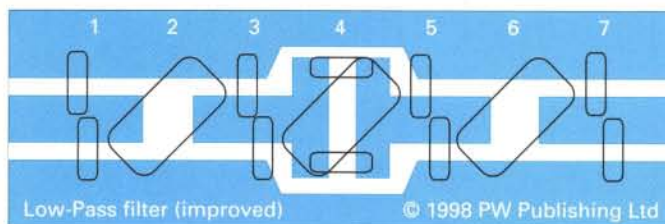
Using a small p.c.b. can make construction of the filter much easier and neater.
